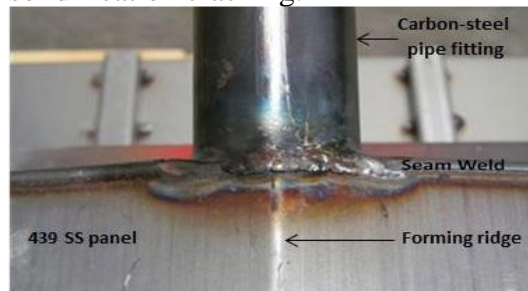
Crack in DMW joint between 439SS oil tank and carbon steel pipe fitting (Wang, 2016)
